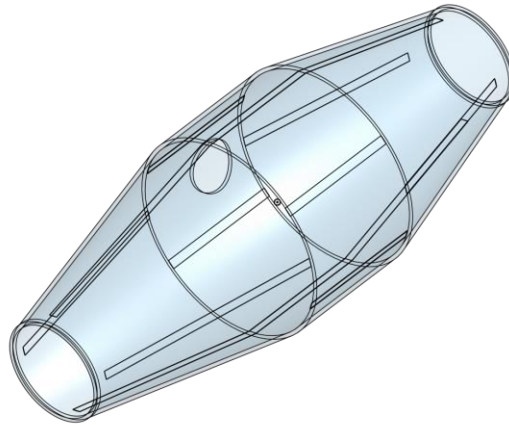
Potential design for weld bands in pressure vessel.
